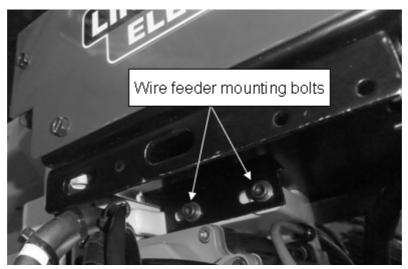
(b) Replacing the wire feeder Auto drive 4R100 (2/3)
